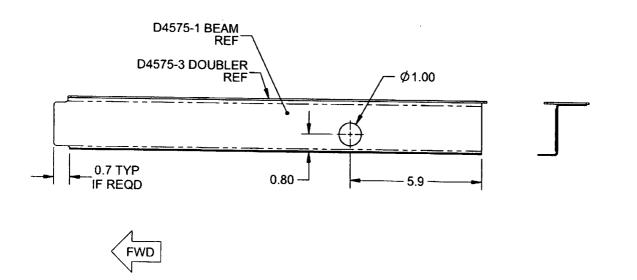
RELIEFS ON D4575-1/-3 (ONLY D4575-1/-3 SHOWN FOR CLARITY) VIEW LOOKING INBOARD
